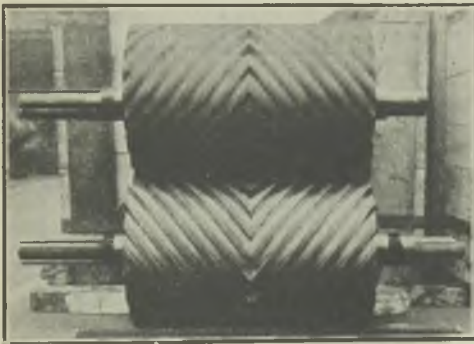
AIR TURBINE ROTOR CASTINGS MADE IN CAST-IRON MOULDS.
